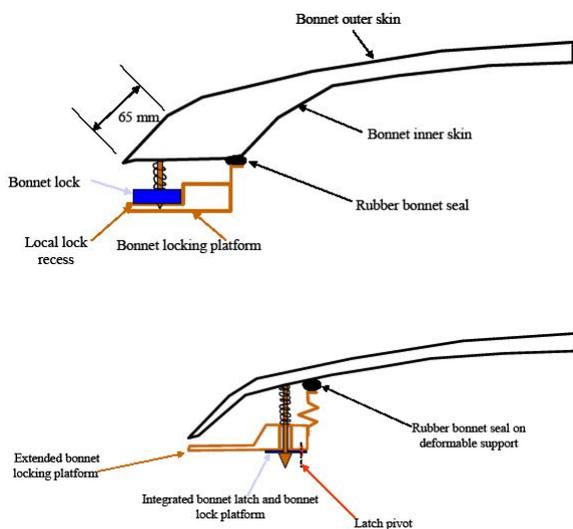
Bonnet reinforcement. Existing and changes proposed.[5]
